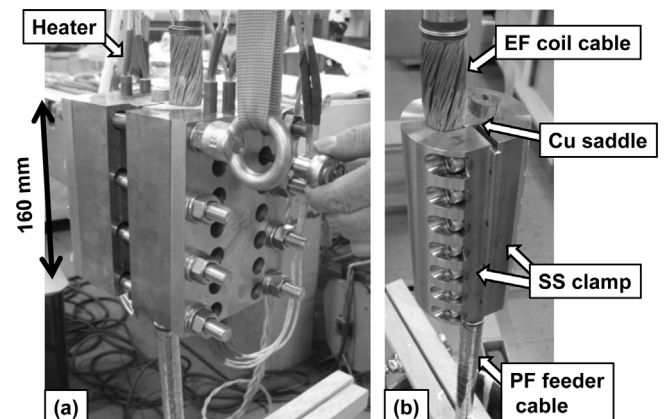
(a) The connecting tool and (b) the manufactured joint.
